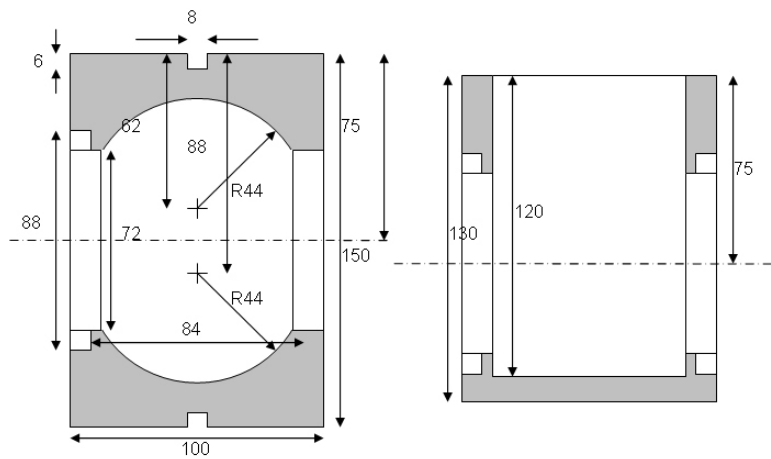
Mixing chamber top view (left) and side view section (right).
